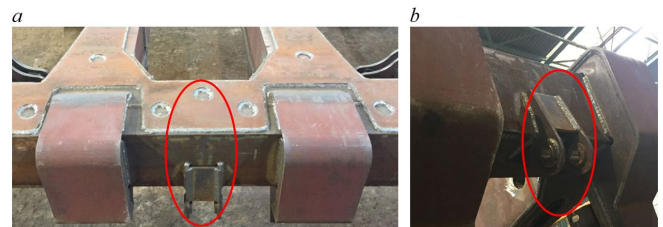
Side longitudinal beam of the frame with welded reinforcing linings (gussets) and supports for hydraulic oscillation damper: *a* – top view; *b* – bottom view.
